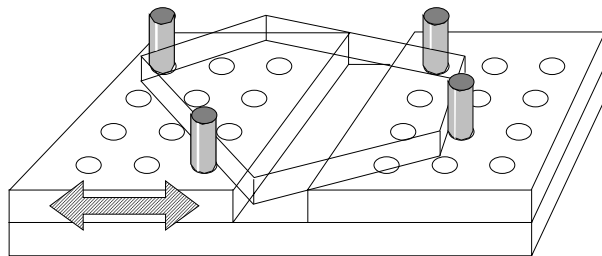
A fixture vice consists of two fixture table jaws capable of translating in x .
